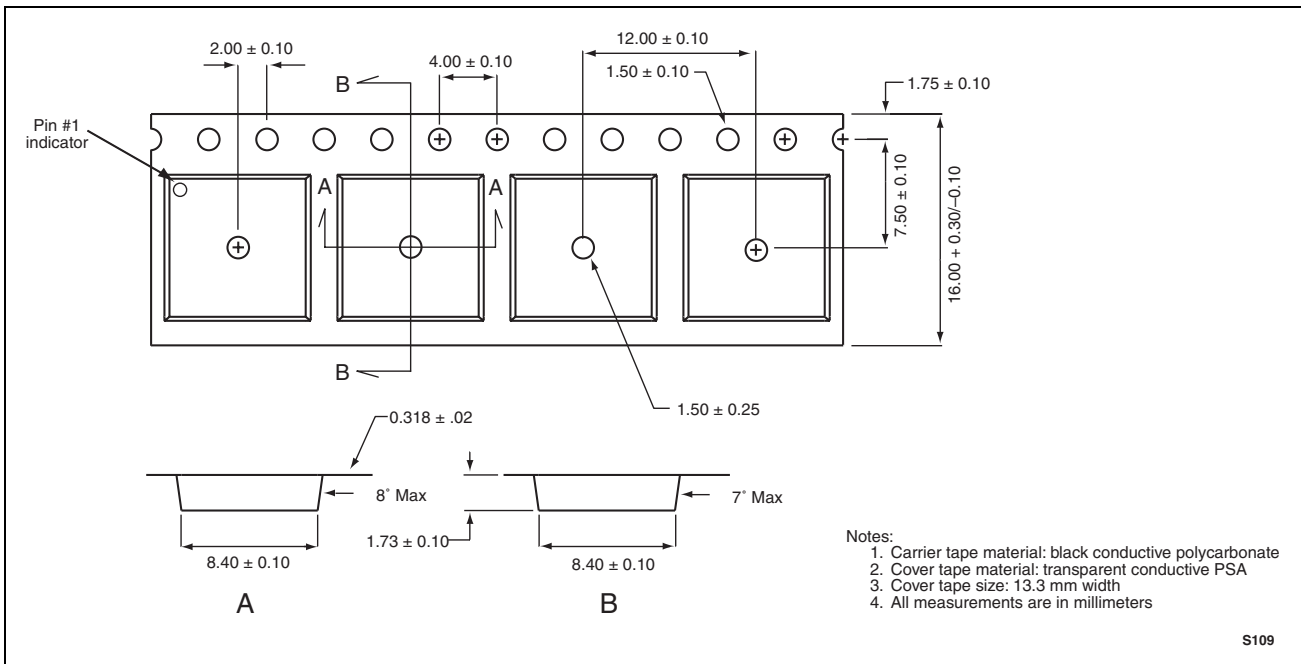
CX74063-26 56-Pin RFLGA Tape and Reel Dimensions
